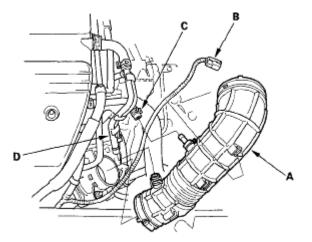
Identifying Intake Air Duct, Vacuum Hose And Breather Pipe Courtesy of AMERICAN HONDA MOTOR CO., INC.
